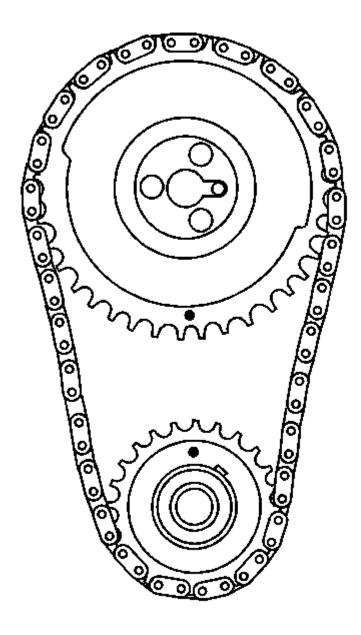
View Of Crankshaft & Camshaft Sprockets Aligned Courtesy of GENERAL MOTORS CORP.
